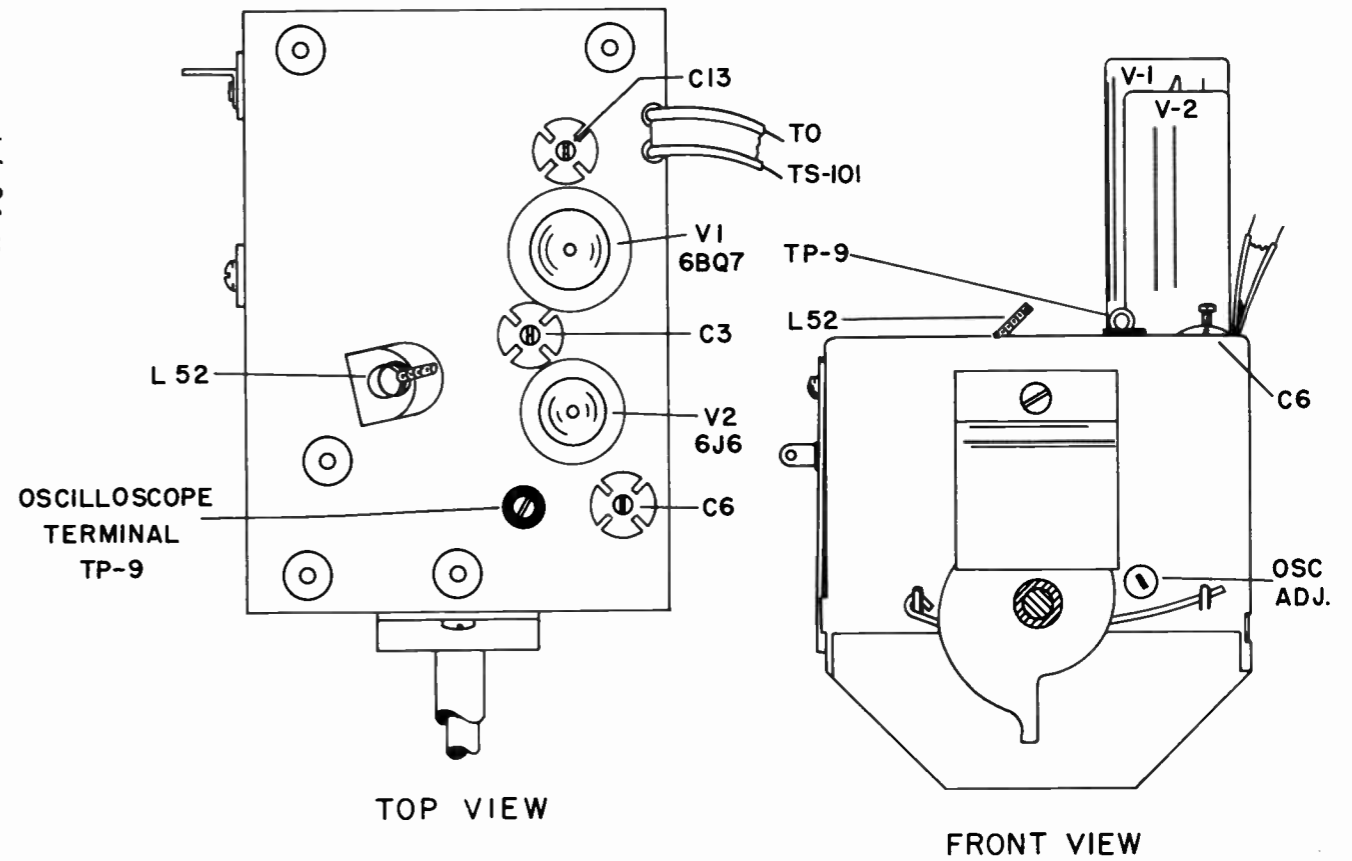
A. Top View Alignment Adjustments for TV Tuner with L-52 & L-113 Coupling Circuit
